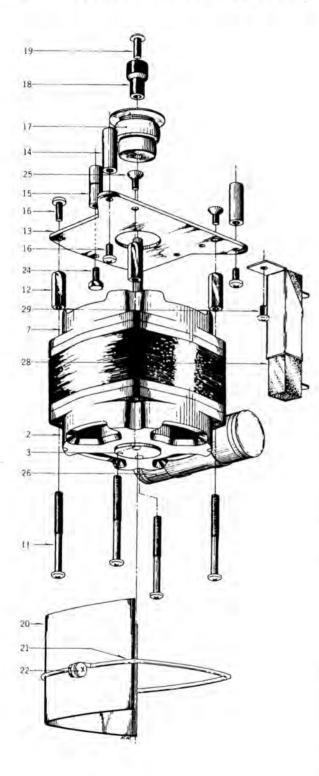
ILLUSTRATION OF SUPPLY/TAKE-UP REEL TABLE BLOCK
